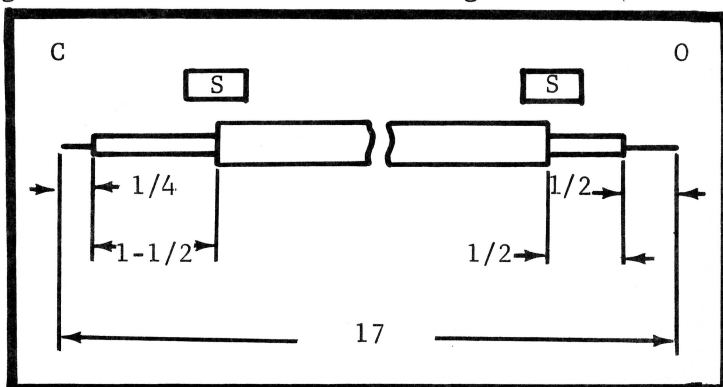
Dimensions for Cable #2 for Resistance Programing. Dimensions are in inches.
